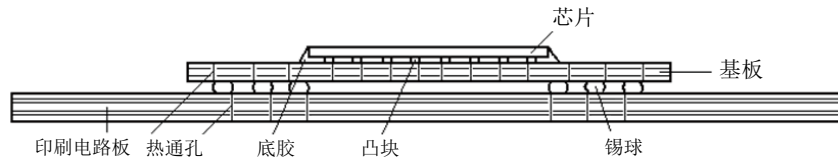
Type 1 assembly (A typical flip-chip plastic ball grid array assembly)
